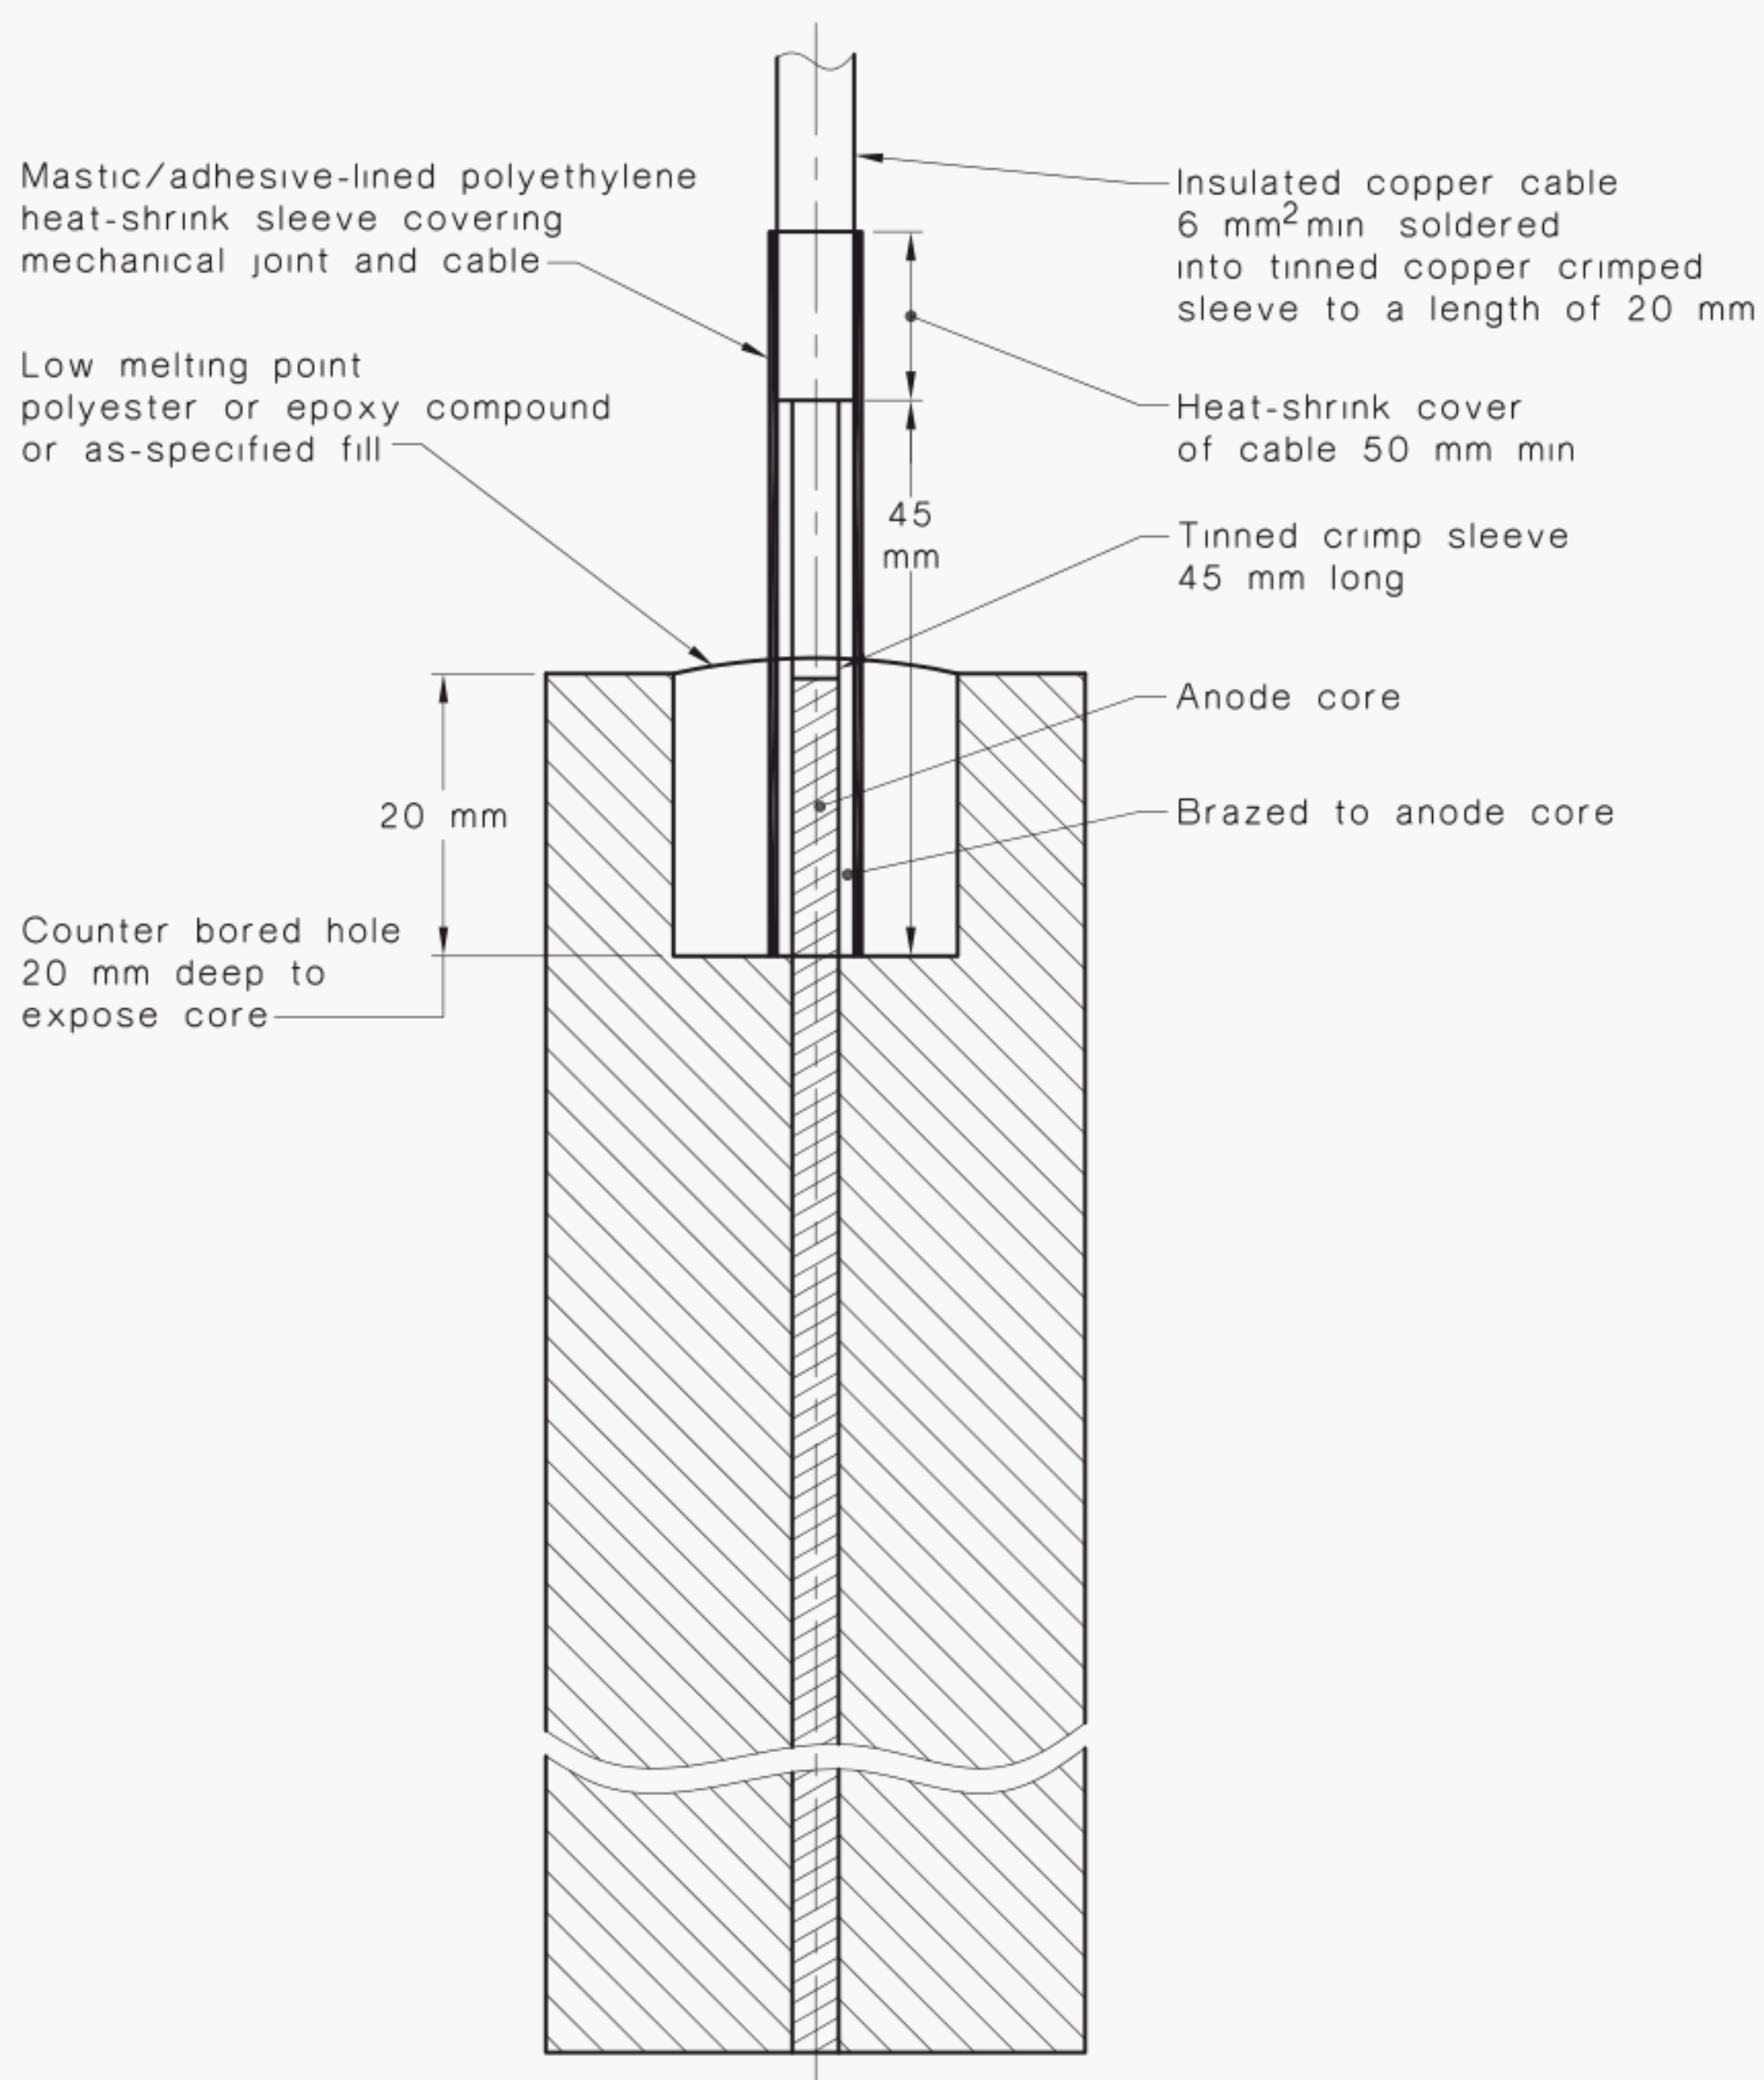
METHOD OF CABLE ATTACHMENT FOR EXTRUDED BURIED MAGNESIUM ANODES
